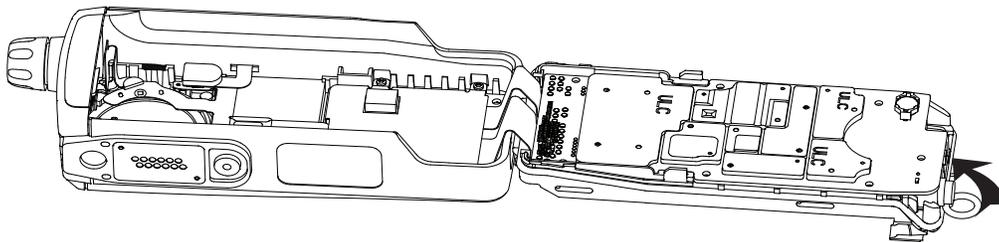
Assemble the Main O-Ring at Antenna Holder
